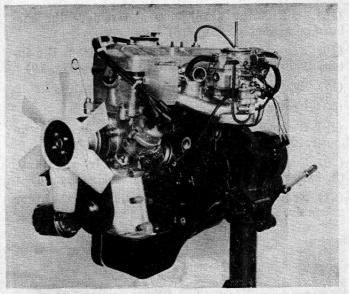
Installing the Engine Assembly on the Engine Service Desk
